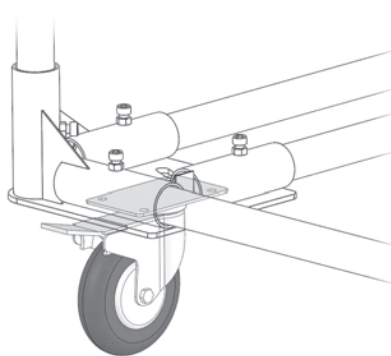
PLATE-TYPE SWIVEL CASTER WITH BRAKE, Ø 125
